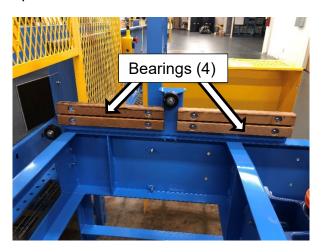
Pusher Frame Assembly Wood Bearings Example - Blade Removed
